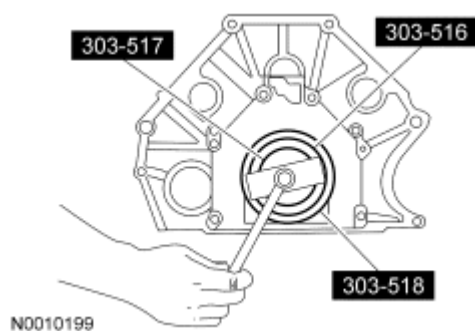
Installing Crankshaft Rear Oil Slinger Using Special Tools
